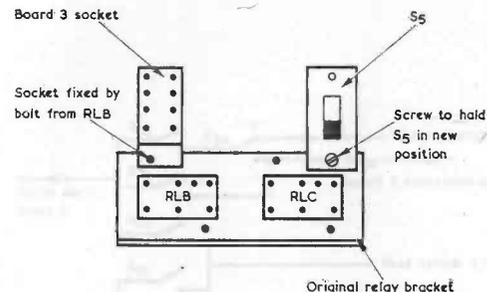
Mounting S5 in its new position. Also shown is the socket for Board 3 employed in the prototype. Alternative sockets may have a different appearance and require other methods of mounting
